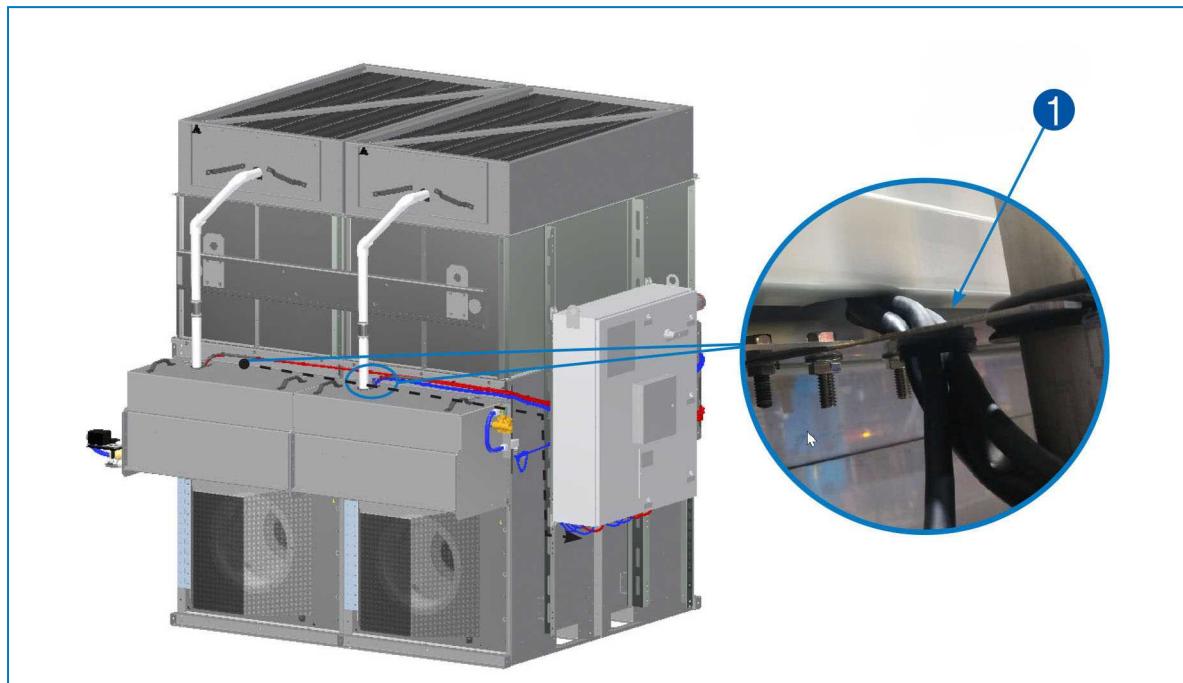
Pump wire to the iPilot™ Control System panel - 1. Pump wiring through grommet.
